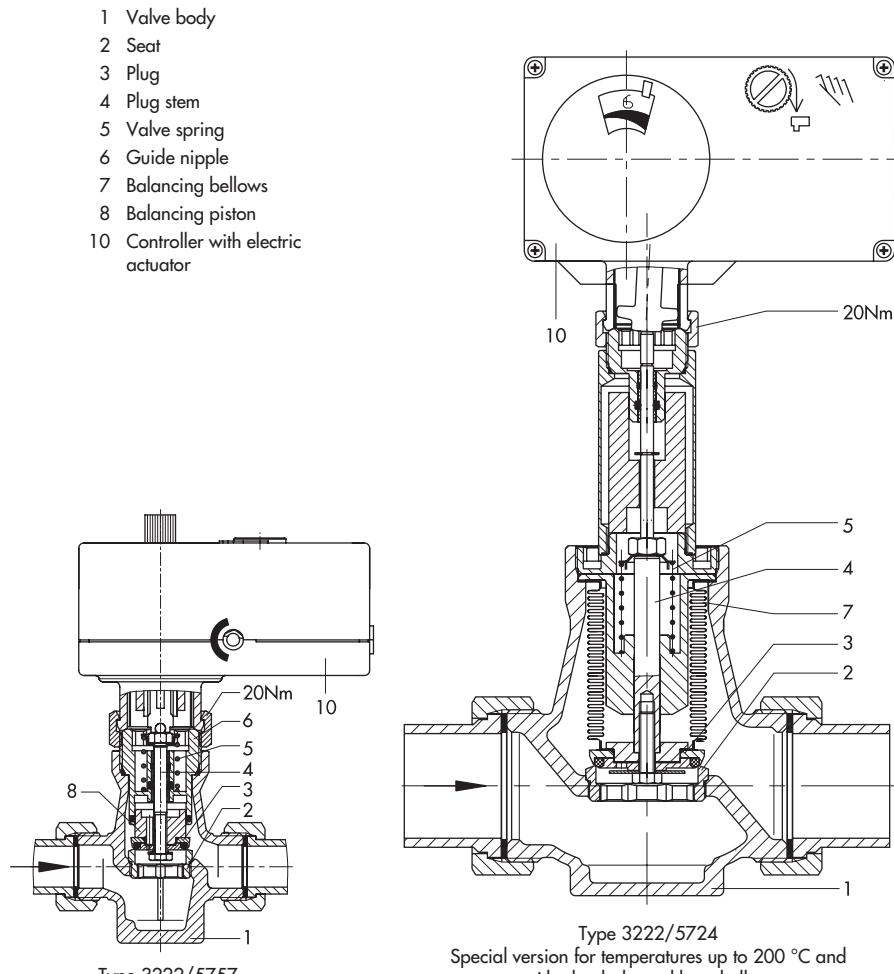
· Type 3222/5757 and Type 3222/5724 Electric Control Valves/Controller with Electric Actuator
